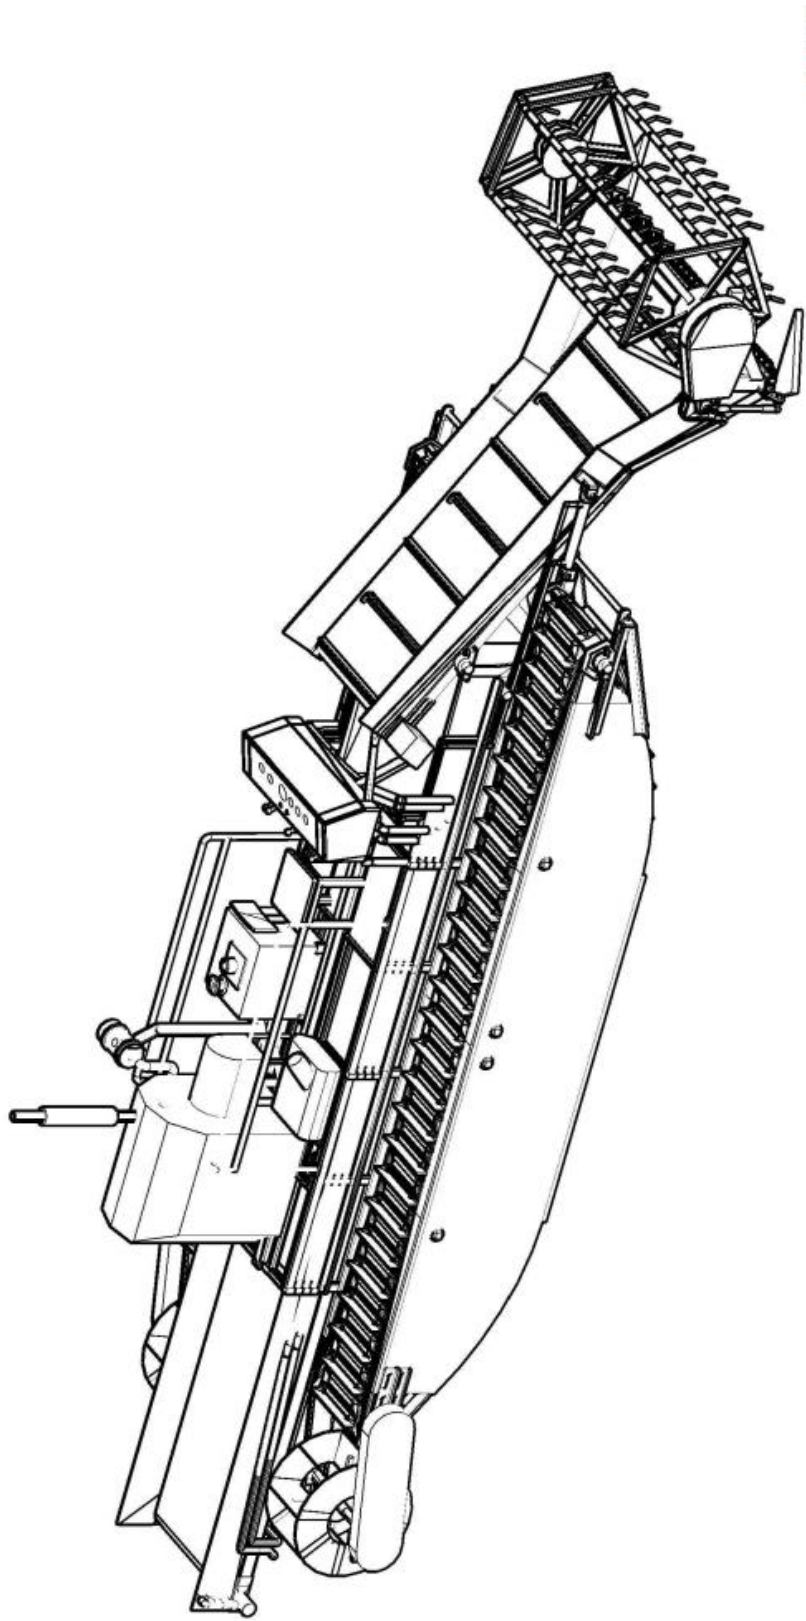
Isometric view of the KAU Pokkali paddy harvester
